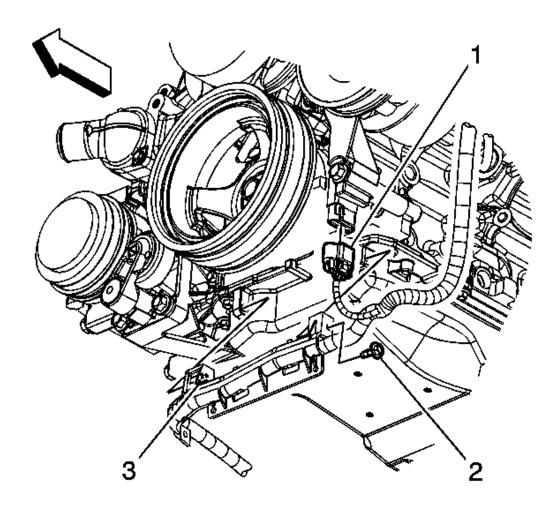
View Of Electrical Connector, Cable Channel Bolt & Pin Courtesy of GENERAL MOTORS CORP.
